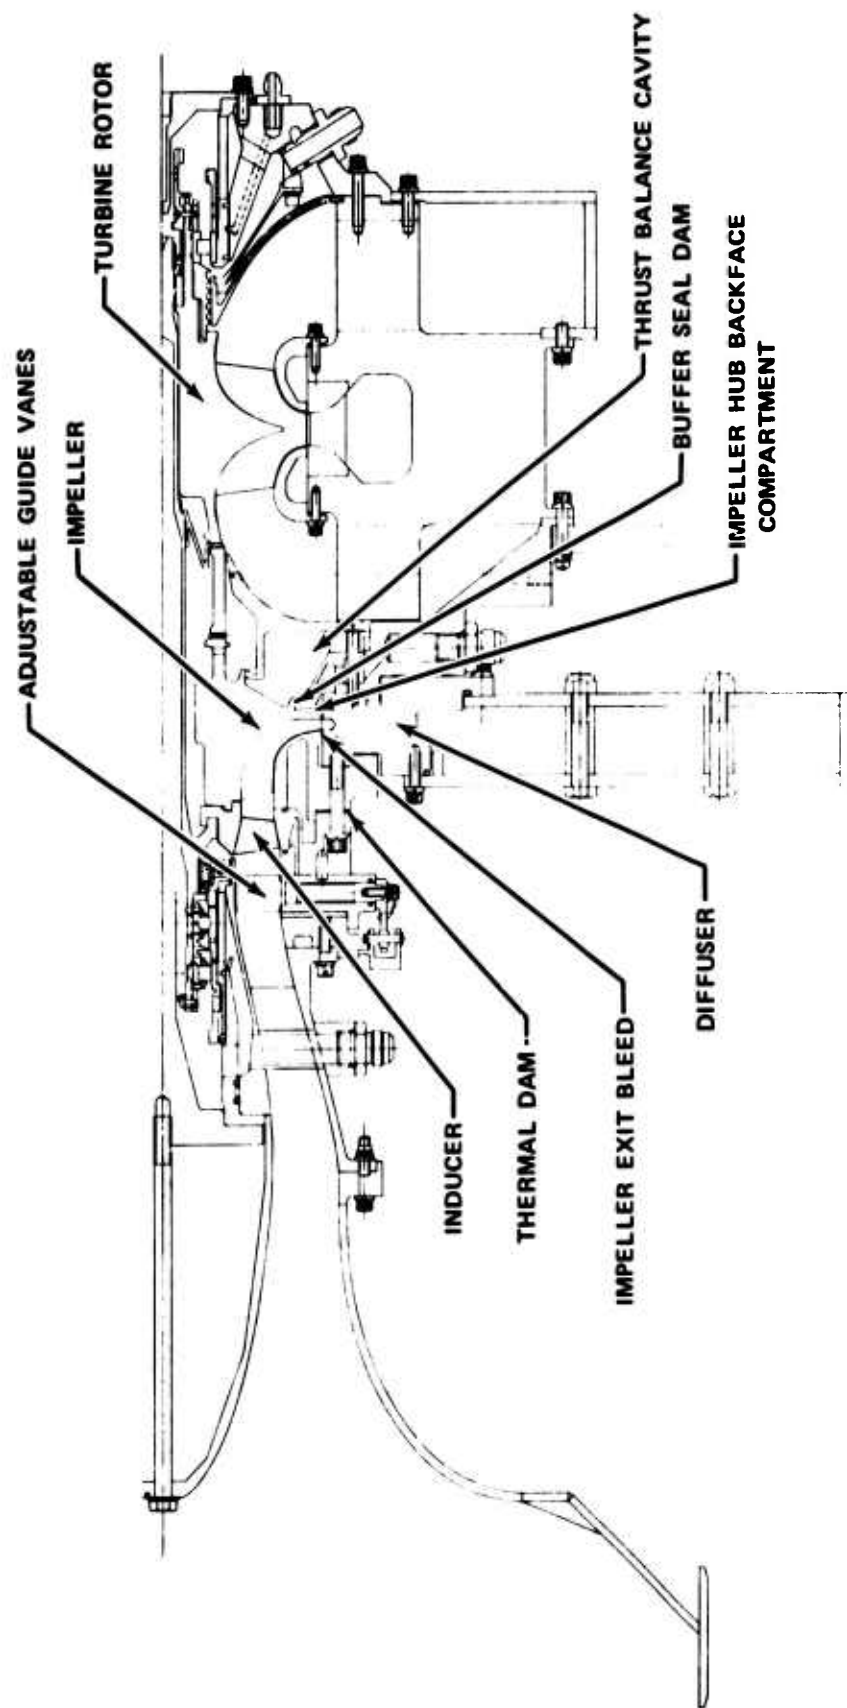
Modified Centrifugal Compressor Mounted on FRDC Drive Turbine.
